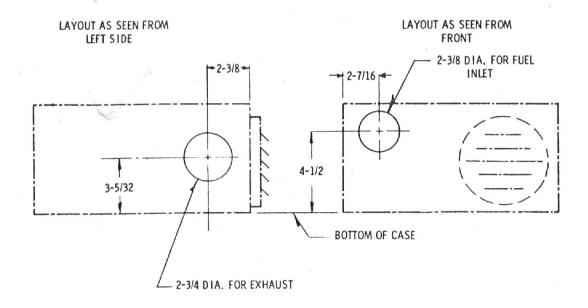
Model UH-47-6LP Heater, Mounting Dimensions.
